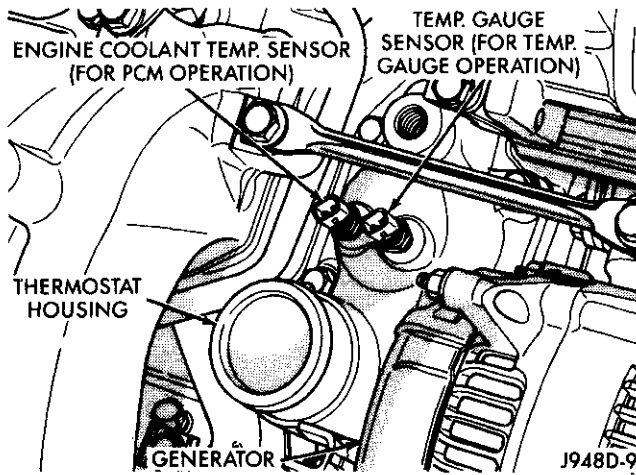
Engine Coolant Temperature Sensor—8.0L Engine
